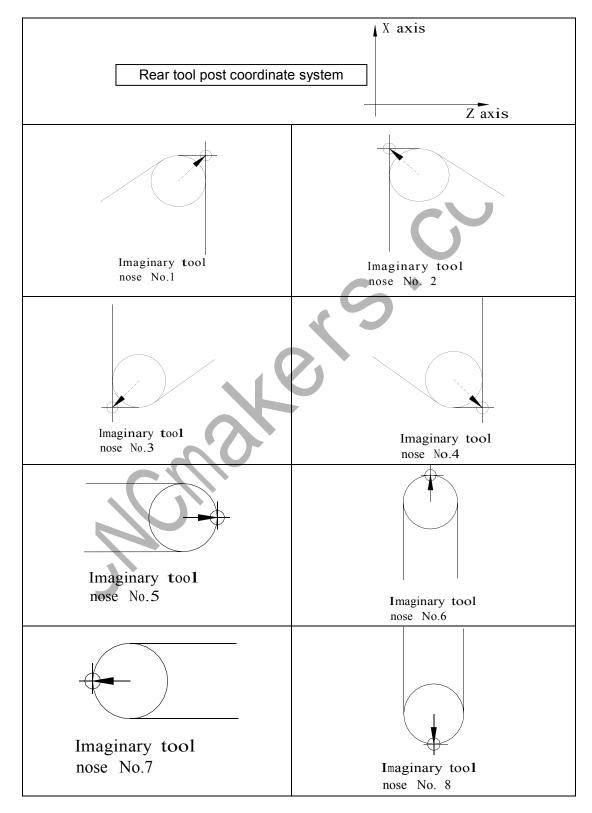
Imaginary tool nose number in rear tool post coordinate system
